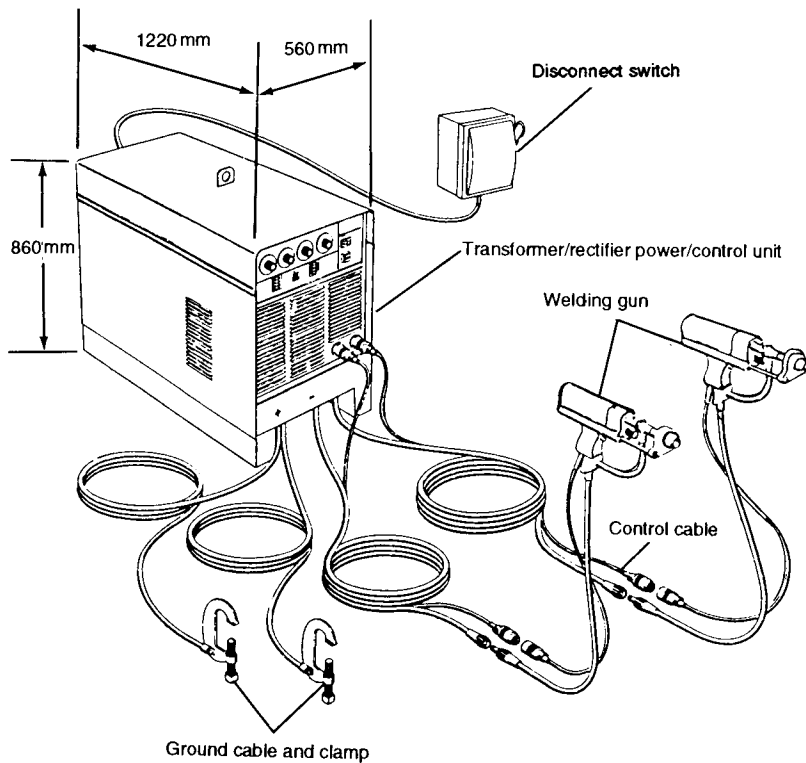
Typical integrated power/control system for stud arc welding
